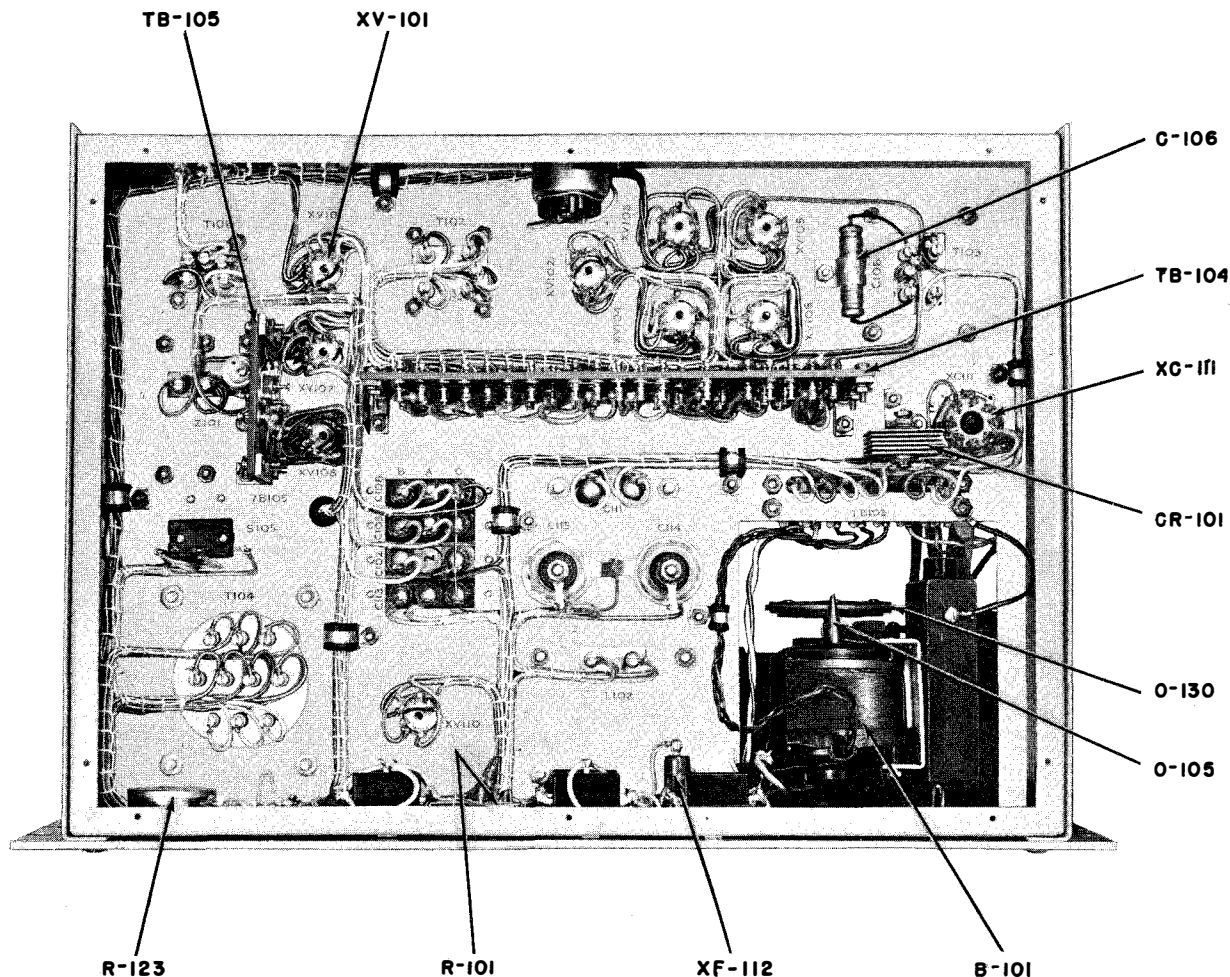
Recorder Bottom View, Cabinet & Base Plate Removed
